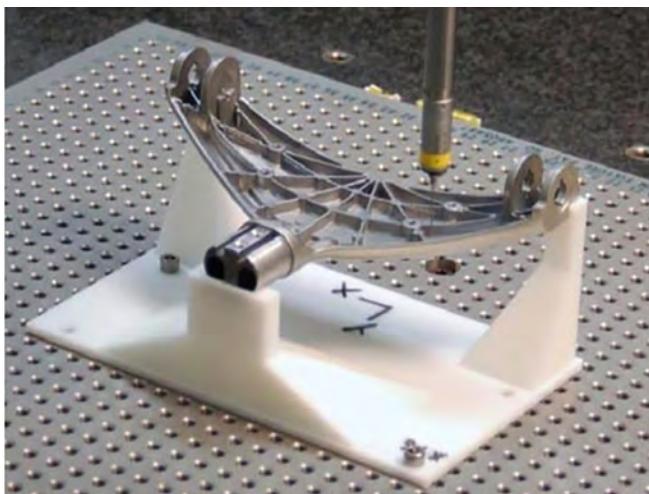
3D-printed inspection gauge. (Source: [Prove3D](#))
